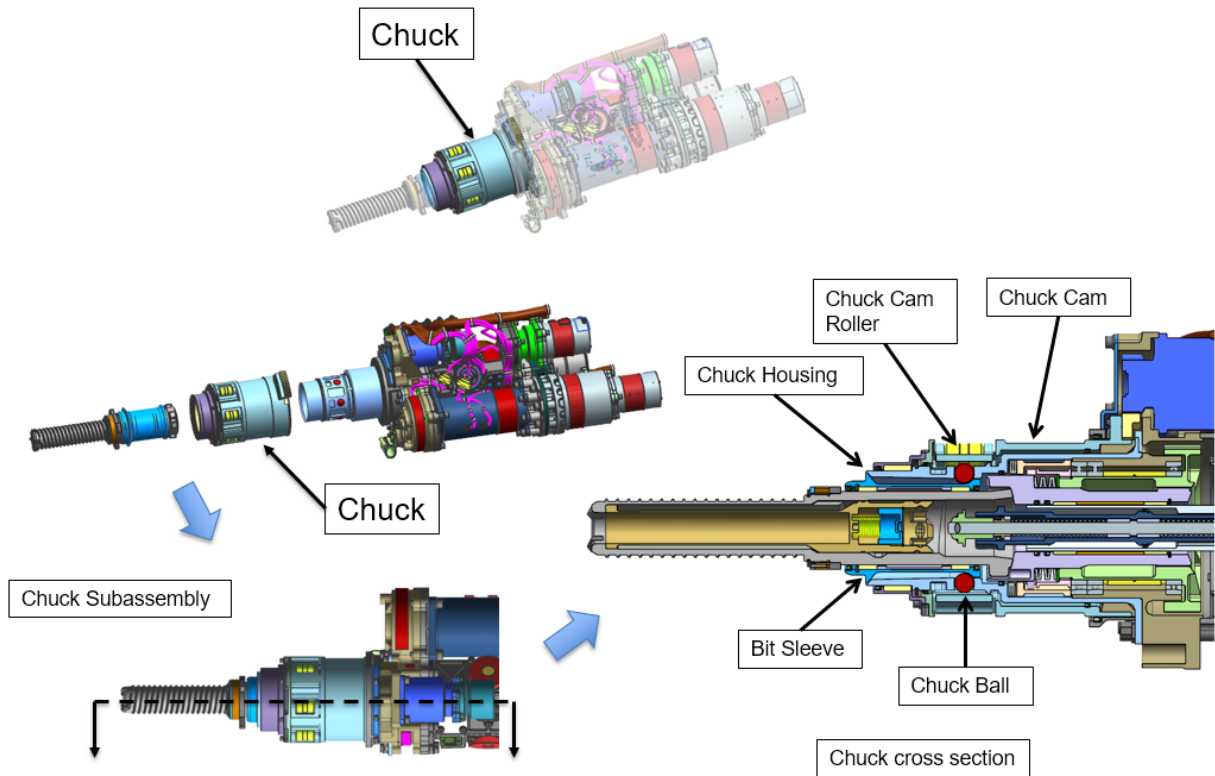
Location of chuck mechanism within overall Mars 2020 coring drill as well as cross sectional view of major components.
